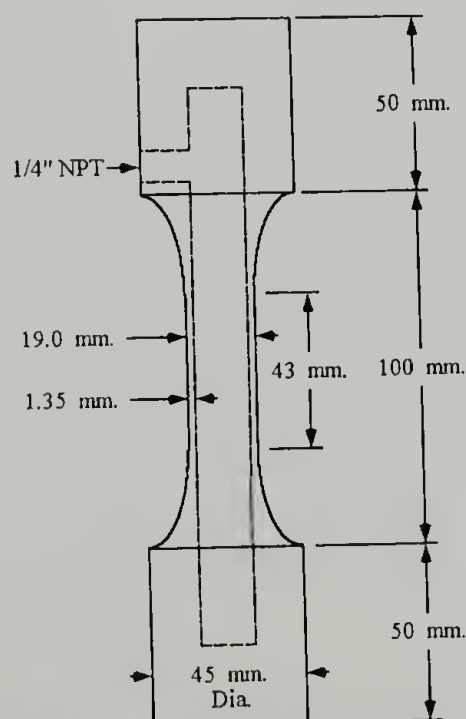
Dimensions of hollow cylinder sample used for multi-axial testing.
